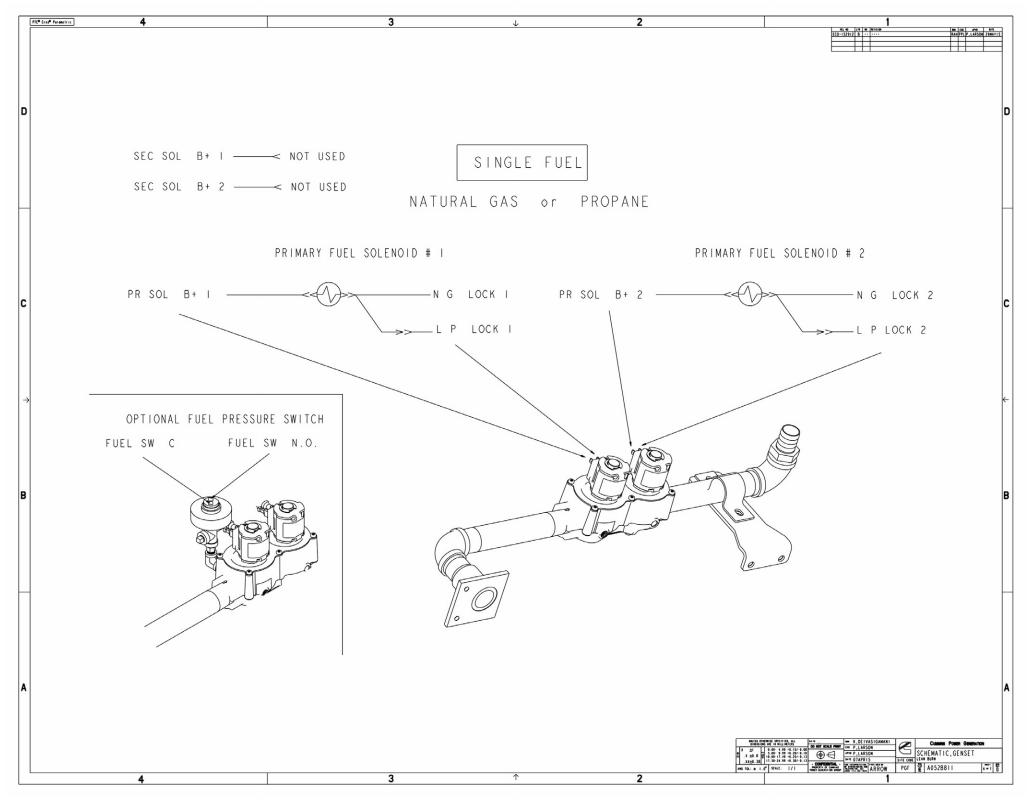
WIRING DIAGRAM FOR PCC 1302 (90 PIN ECM) (SHEET 6 OF 7)
